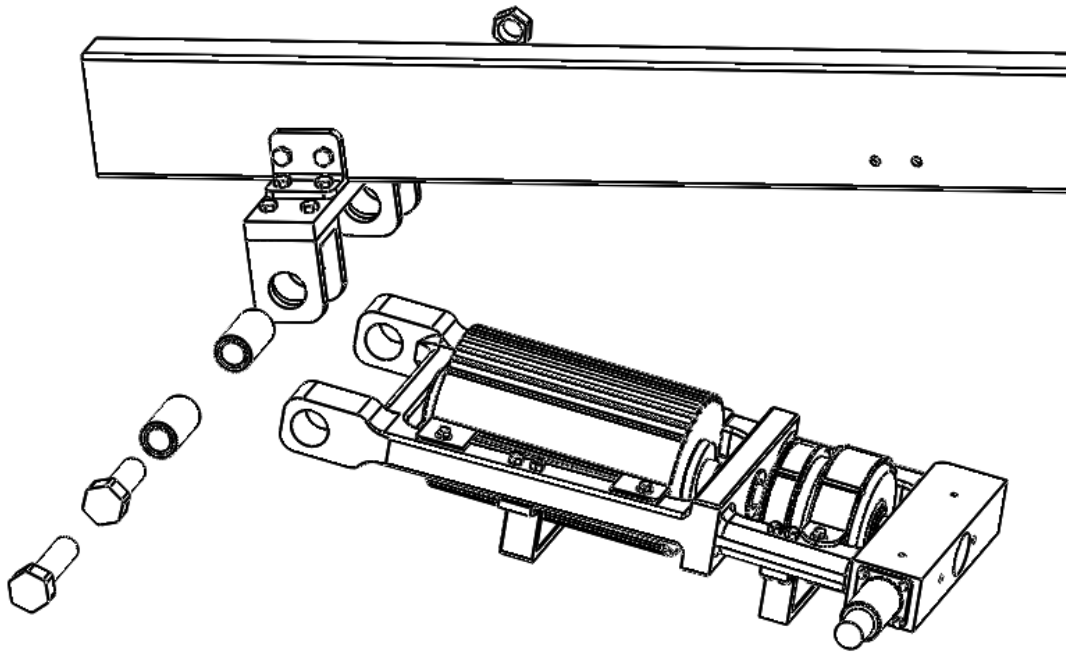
A-ARM ASSEMBLY TO FRAME
